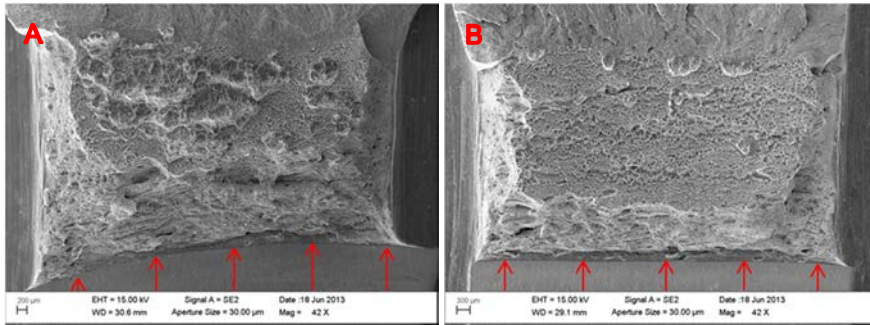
Fracture surfaces of the Alloy 52 NG-DMW miniature-sized specimens.
